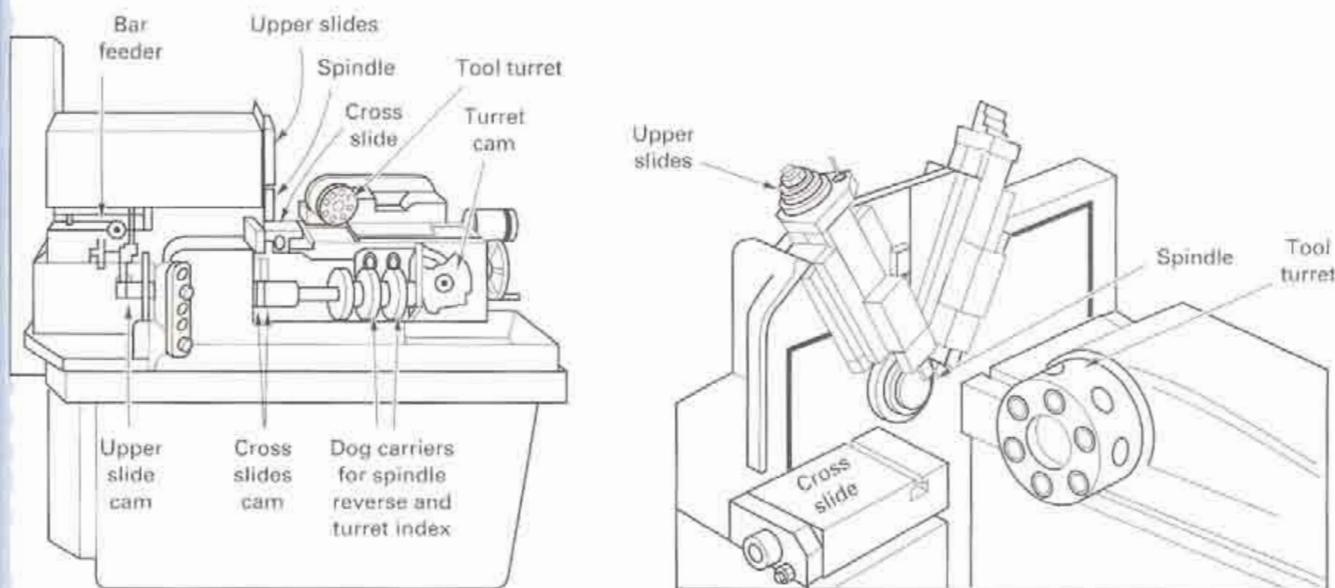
On the turret-type single-spindle automatic, the tools must take turns to make cuts.
